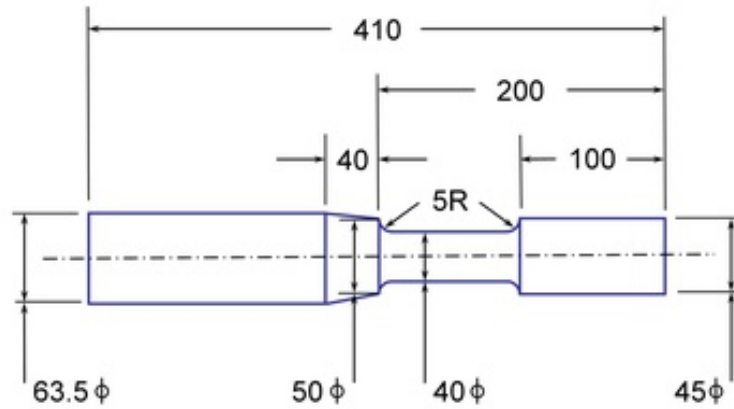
SAE 1045 notched shaft specimen dimensions [7].
